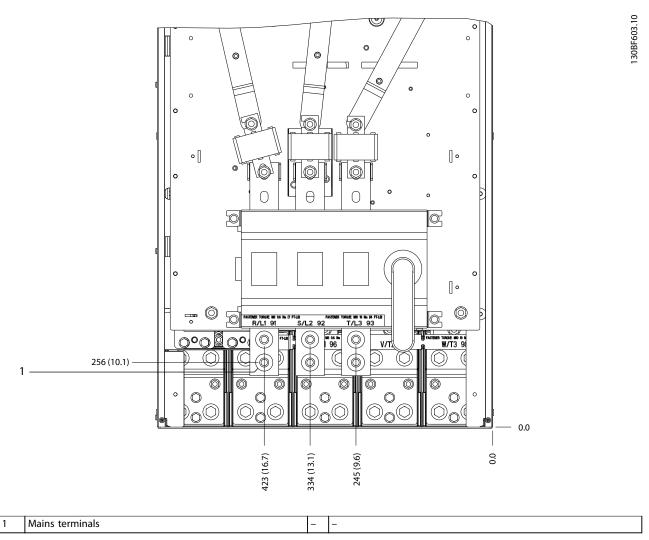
Terminal Dimensions for E2 with Disconnect (380-480/500 V Models: P315; 525-690 V Models: P355-P560), Front View
